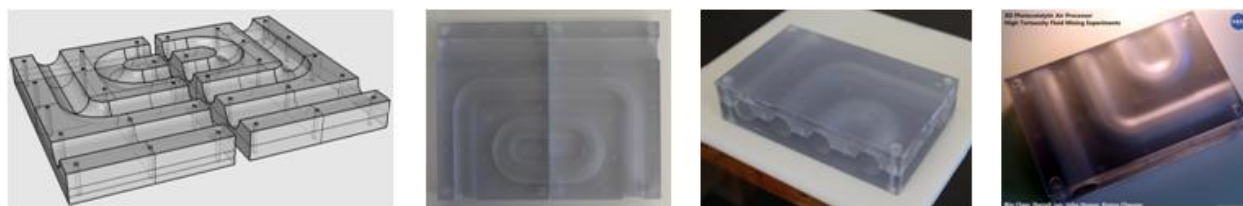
Modular mixing experimental device (L to R) CAD, top view, CNC milled polycarbonate, assembled
